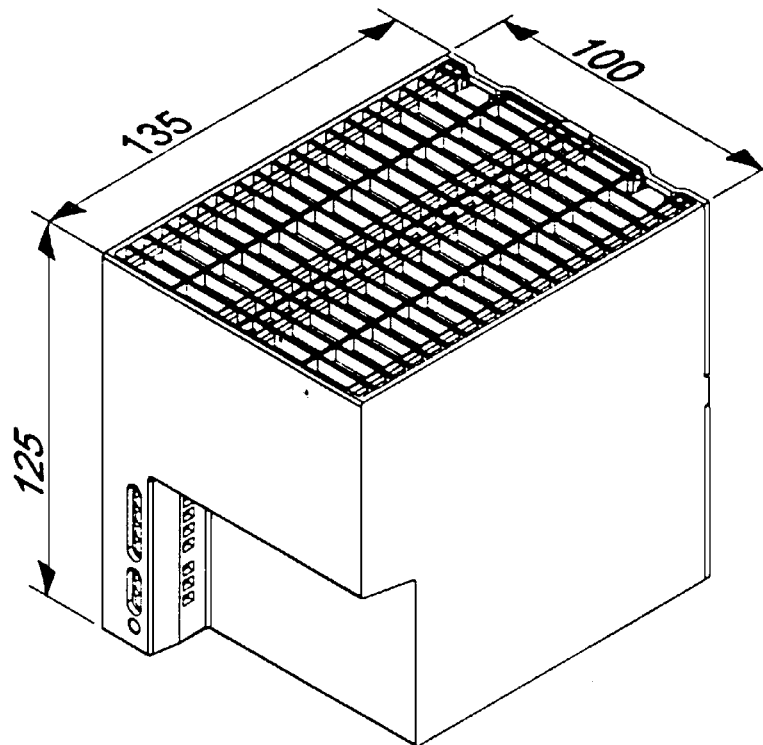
Dimensional drawing for the SITOP Power 10 power supply; dimensions in mm
